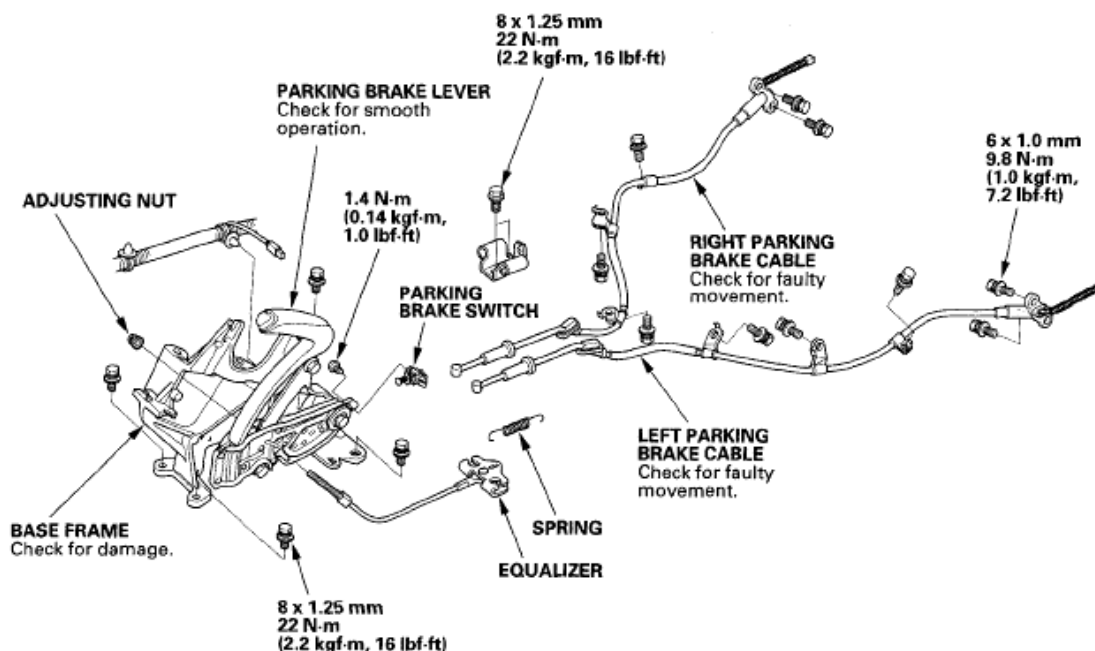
Exploded View Of Parking Brake Components (With Torque Specifications)
